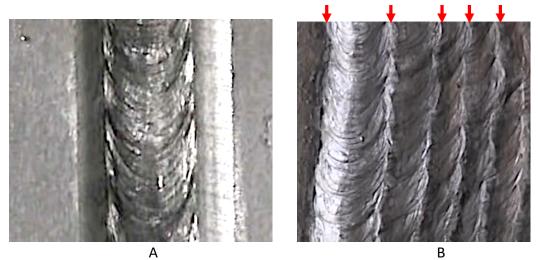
(A) A single stringer bead (Collier, 2015, 2:24) shows a single row of crescent shaped beads. (B) Multiple stringer beads (Collier, 2015, 11:18) show single crescent shaped beads each of which stop at the fusion zone (indicated by red arrows) of each weld pass. Crescents do not overlap between the fusion zones.
